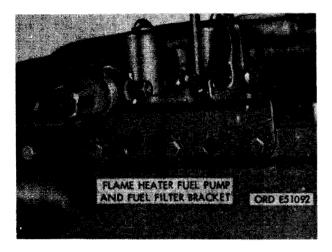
REMOVING OR INSTALLING FLAME HEATER FUEL PUMP AND FUEL FILTER.
